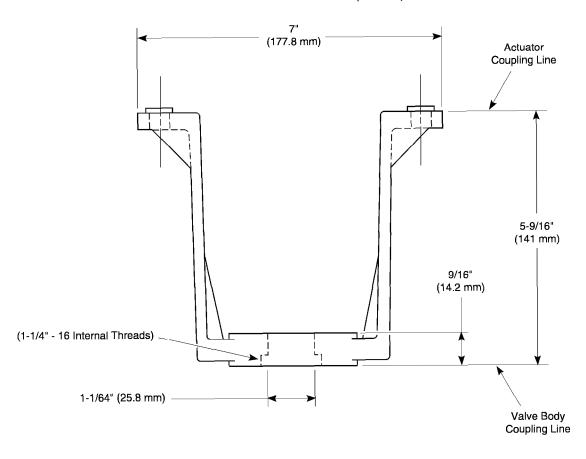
Dimensions of the Valve Linkage Mounting Bracket.
